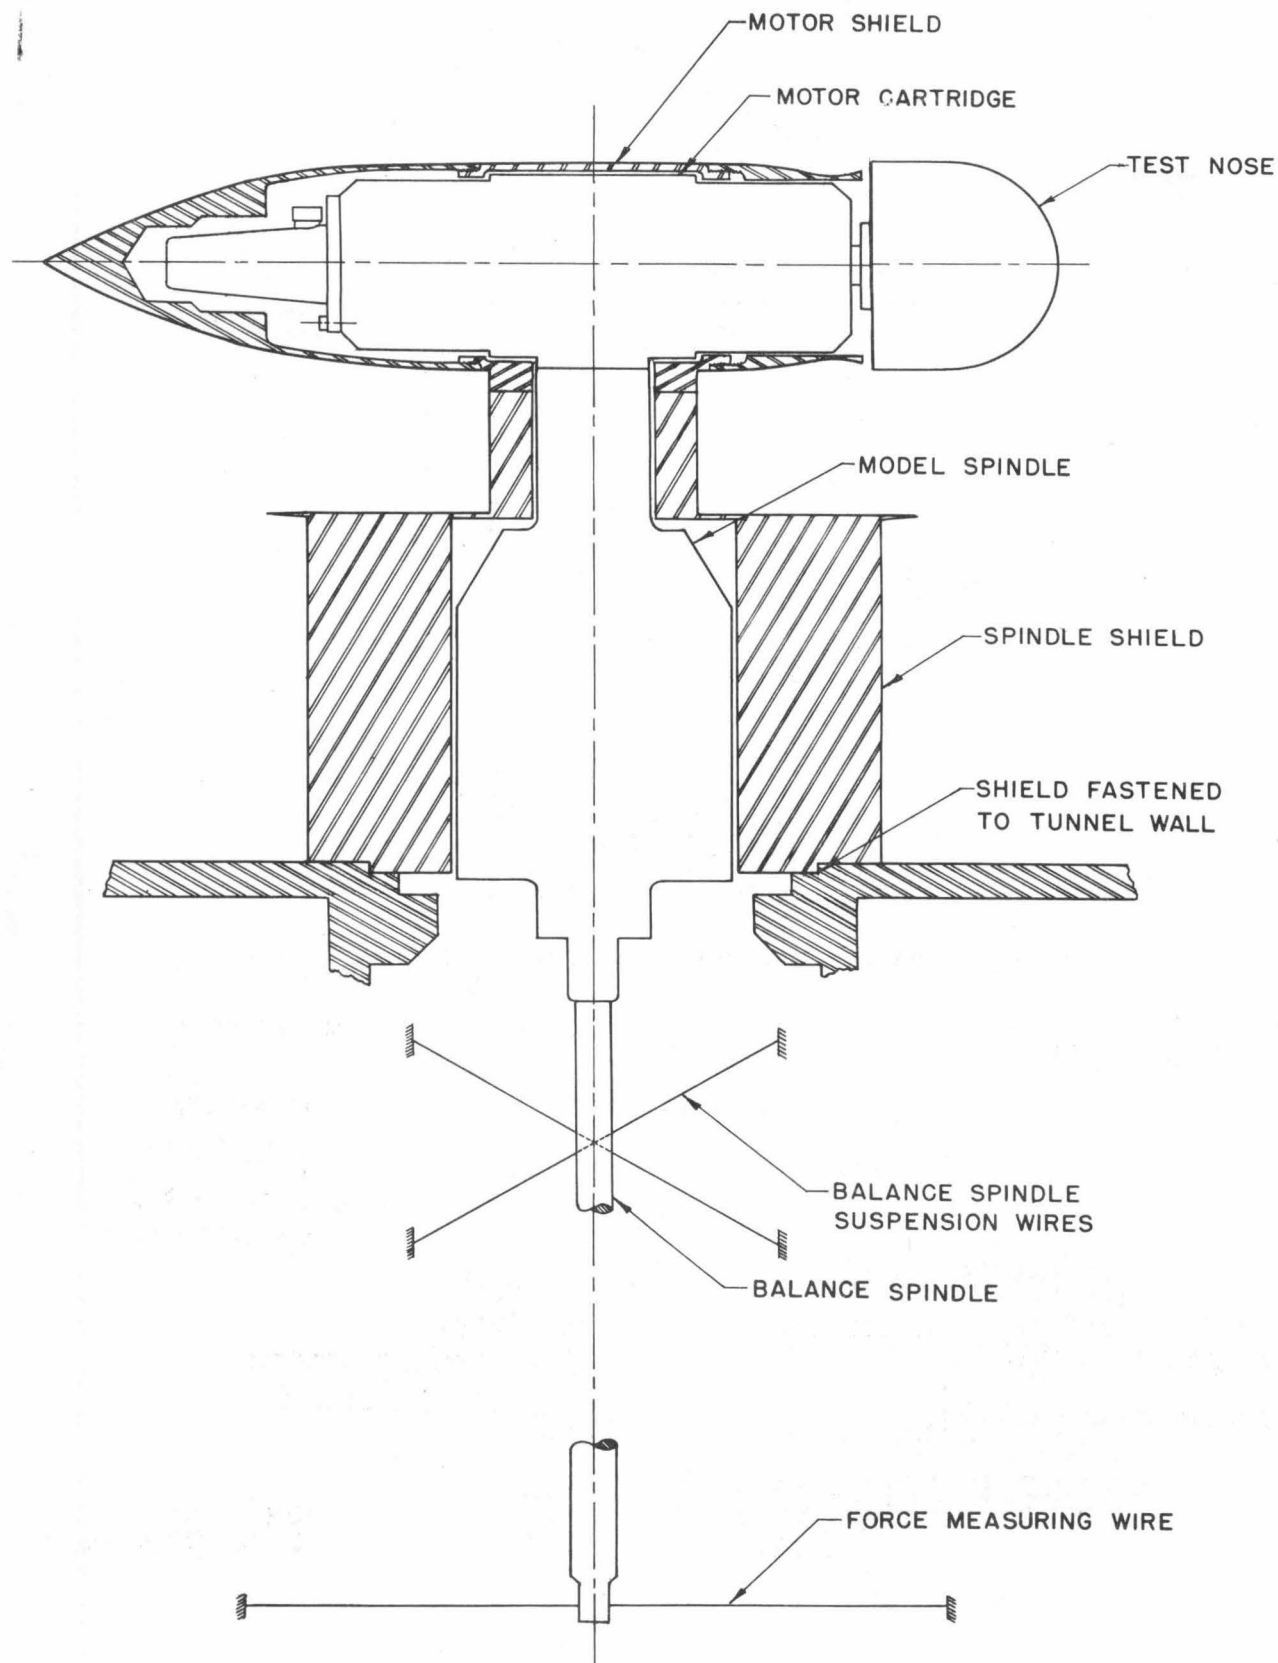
Outline of Test Unit, Spindles, and Shielding
